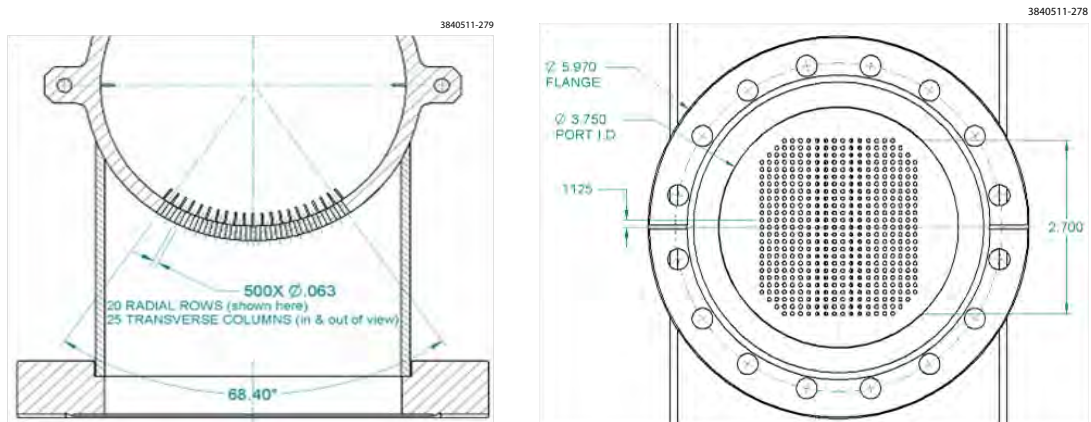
Beam pipe holes for the large electron detector ports built into each of the four test chambers. Left: front sectional view. Right: bottom view.
